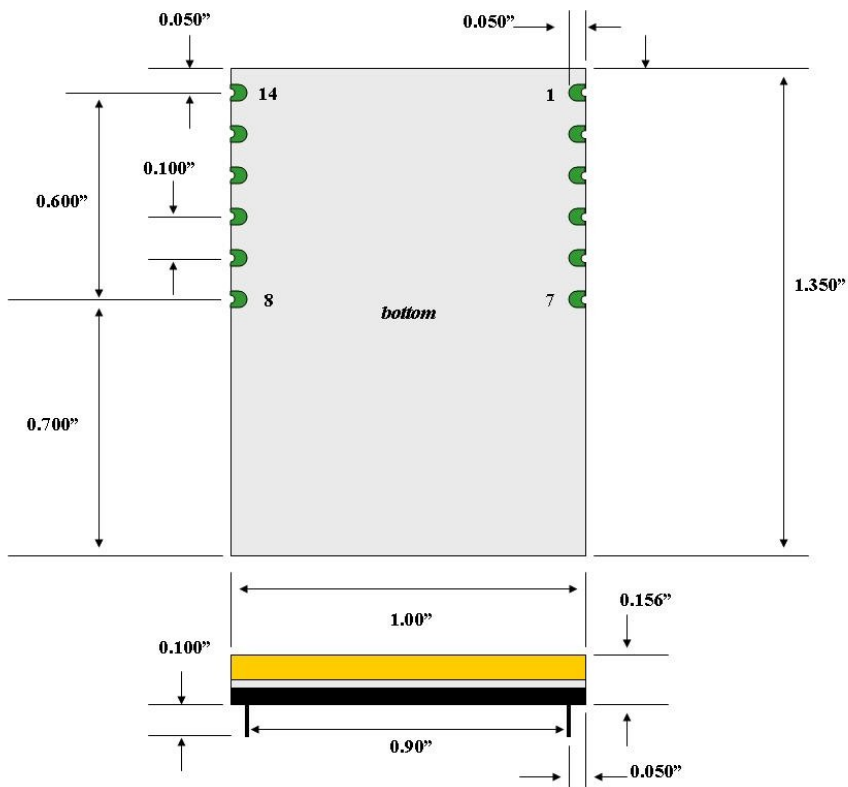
CH80215 Mechanical Dimensions, Through-Hole Versions
